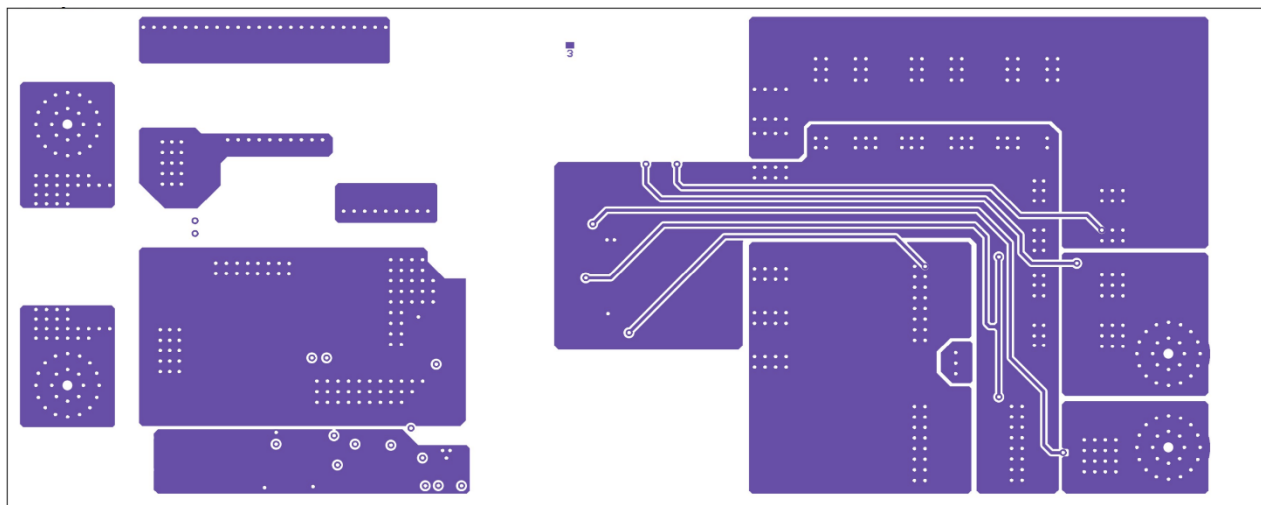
DER-953Q Mid-Layer 3 PCB Layout.
